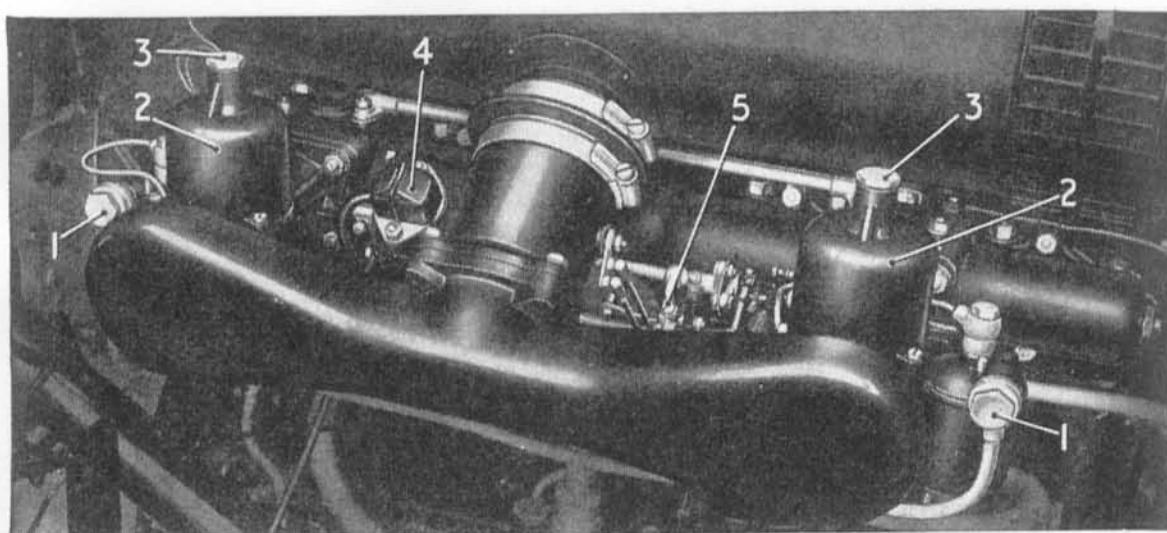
CARBURETTERS IN POSITION ON ENGINE.
